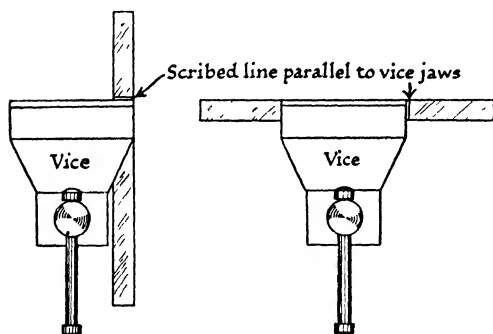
Methods of clamping strip metal in a vice preparatory to bending
